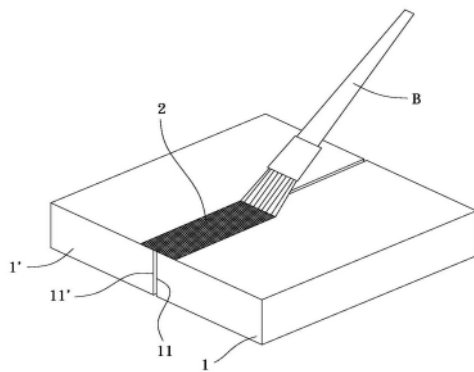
Depicts a schematic diagram showing a welding flux for PH stainless steel spreading on surfaces of workpieces of PH stainless steel to be joined by TIG welding procedure.
